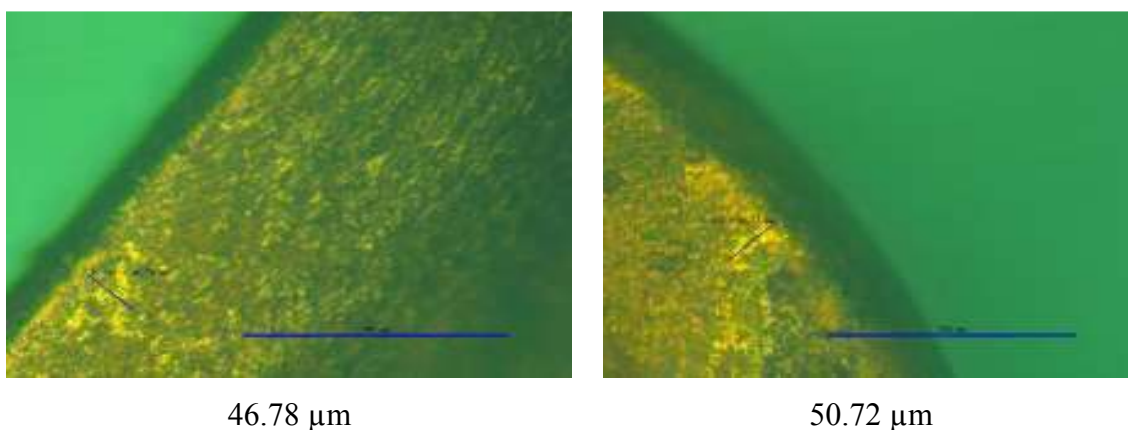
Crater wear on cutting tool with high cutting speed condition
